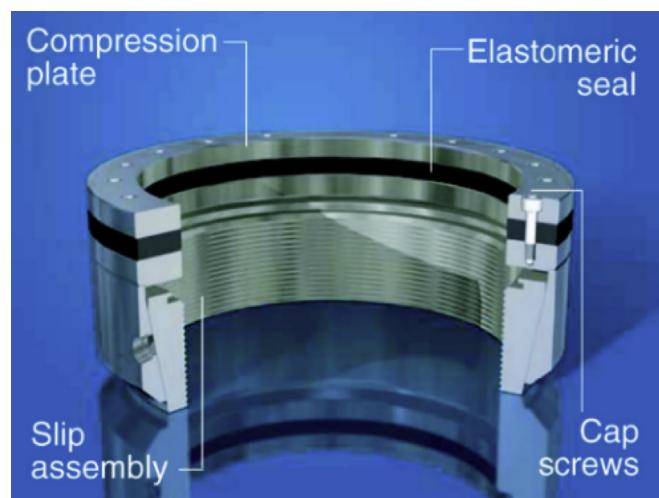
Mechanical-set slip-and-seal assembly in sub-mudline liner hanger assembly (Speer, 2006).
